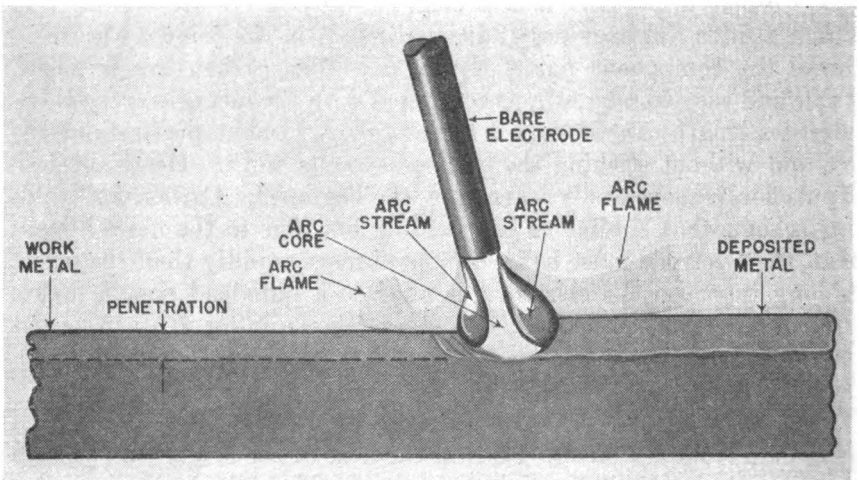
Diagram of bare-metal welding arc.
